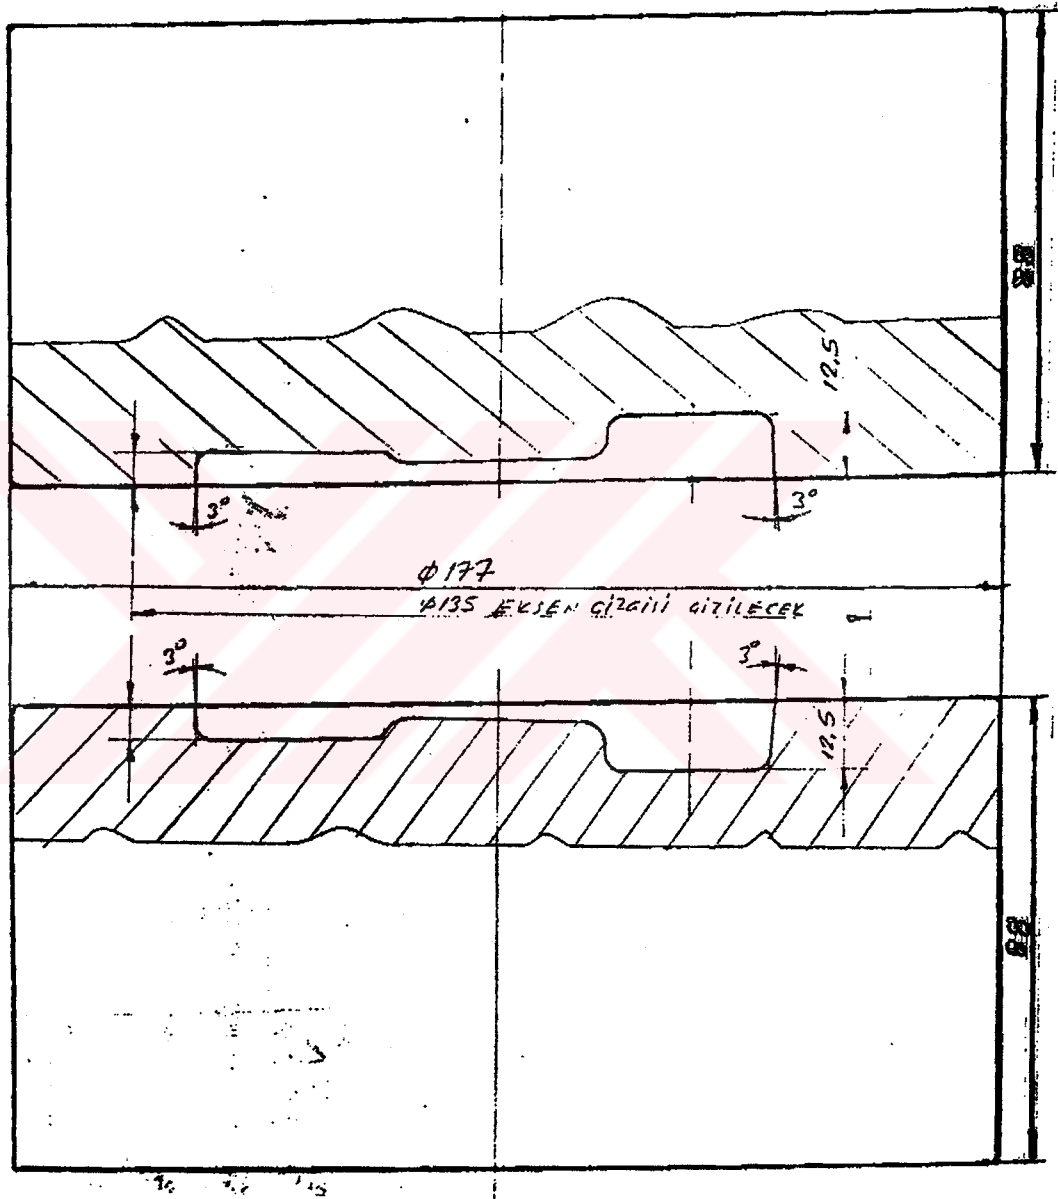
Technical Drawing of AKSAN 198-290.2 Trimming Die
